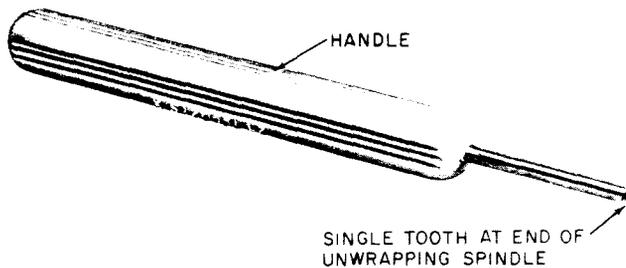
KS-20551, L2, Wire-Unwrapping Tool (for Removing Solderless-Wrapped Connections)
